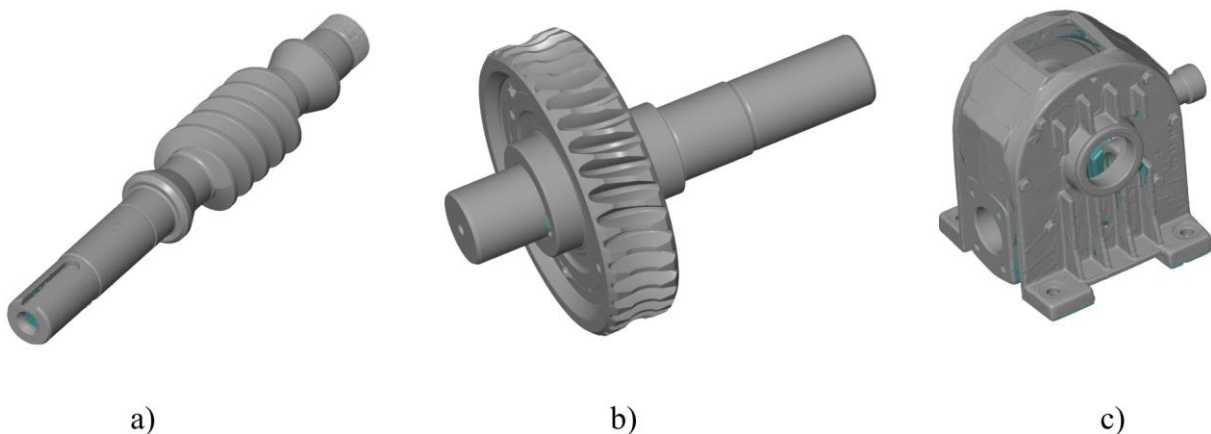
3D optical scans of a) worm, b) worm wheel assembly, c) housing
